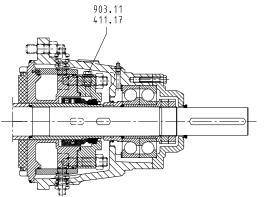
Vent plug for seal chamber (water-cooled seal housing) – Sizes 125 to 150 (and 32-100 as special version if applicable)
